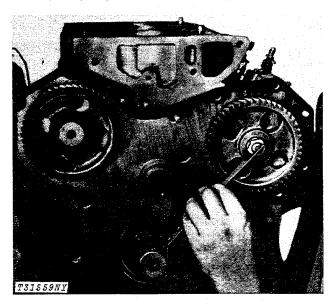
Timing the Injection Pump Gear with JD-254 Tool
